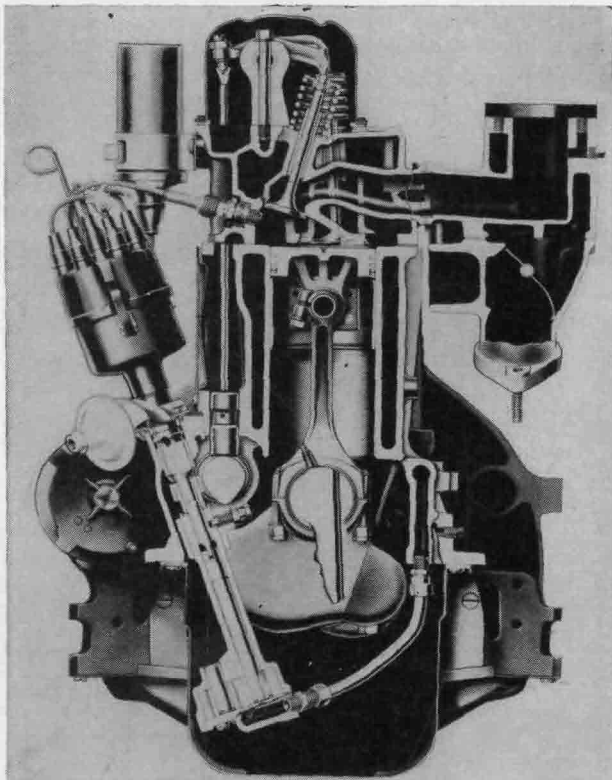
Cross-sectional view of a six-cylinder engine. Piston is at top of stroke. Both piston and cylinder are shown cut in half. (*Chevrolet Motor Division of General Motors Corporation*)
